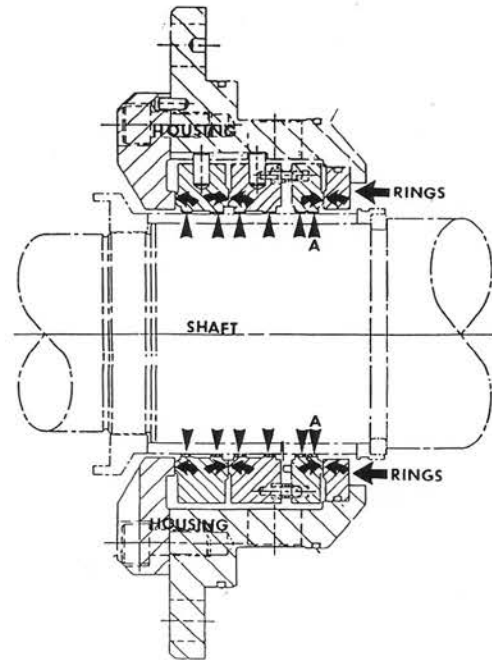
Fretting and Wear Damage on the Oil Film Seal Ring.
